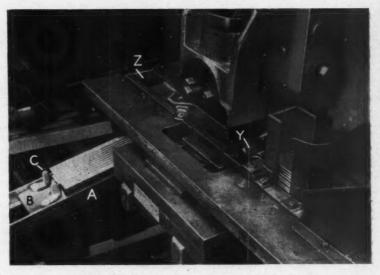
General view of the last press in the bank whereby forming is completed. Completed plates are discharged into a chute that feeds a stacking unit, the work holder of which is seen extending from the front of the press
